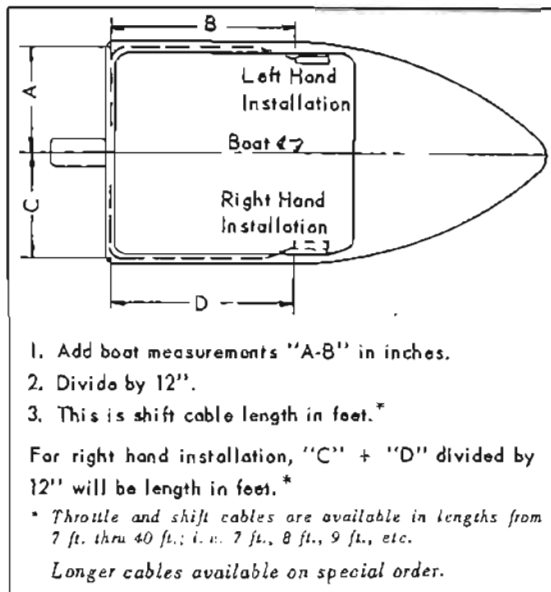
MerCruiser I Stern Drive Unit Shift Cable
